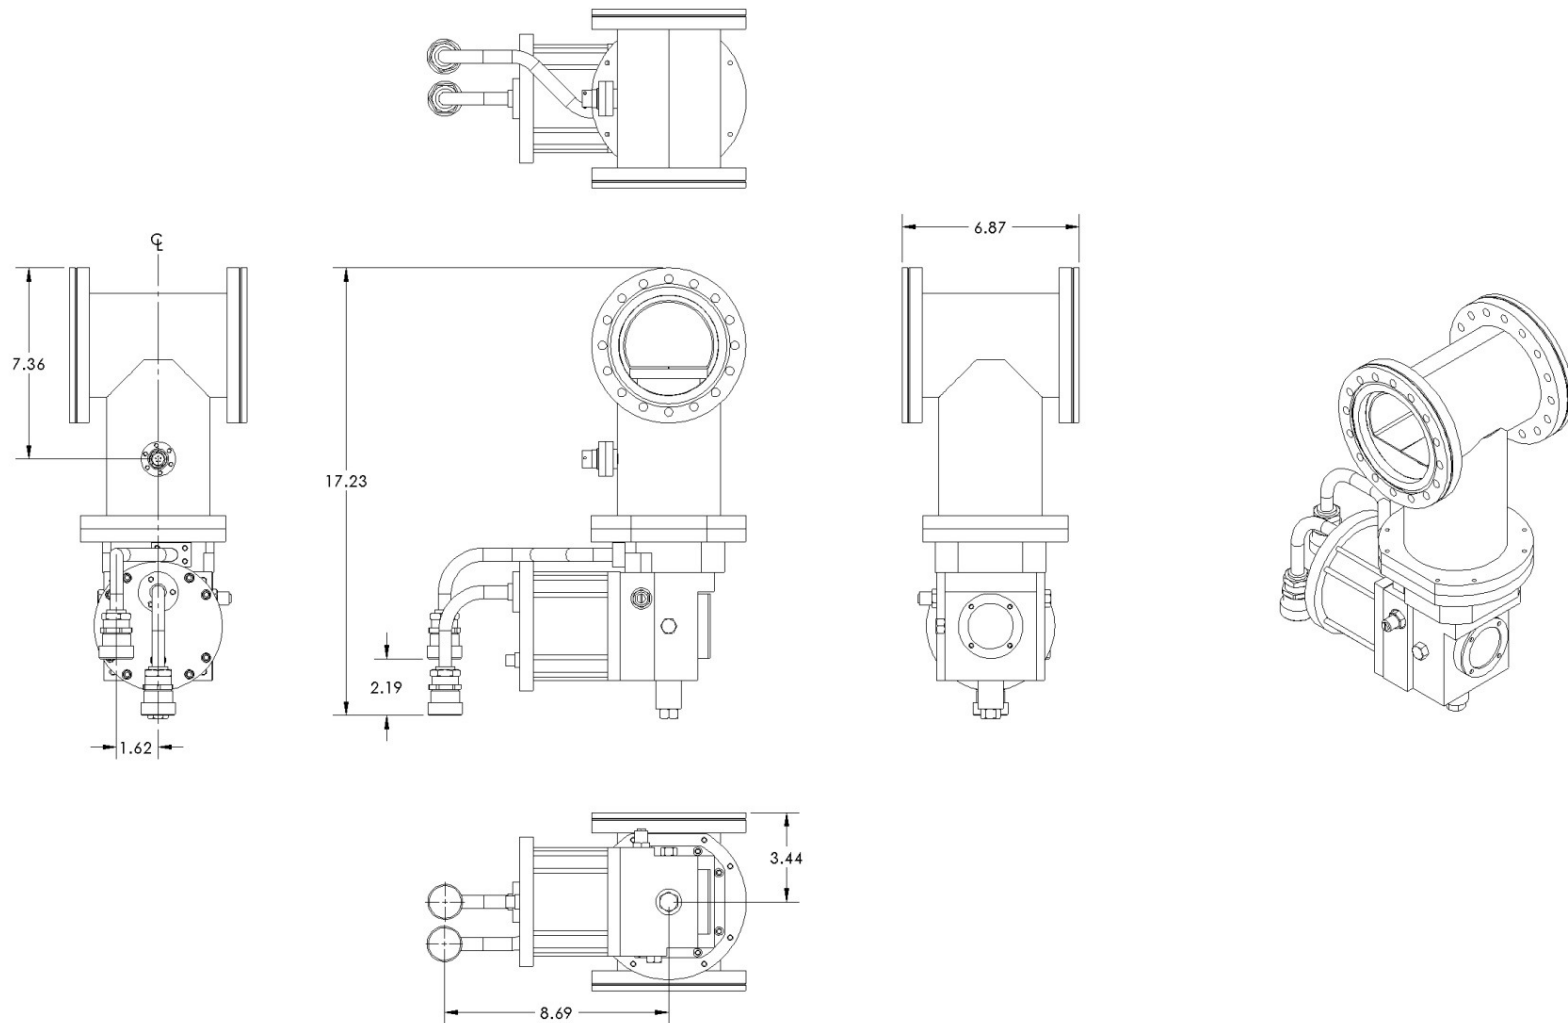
16" In-Line Cryogenic Water Pump with ISO Inlet Flanges
